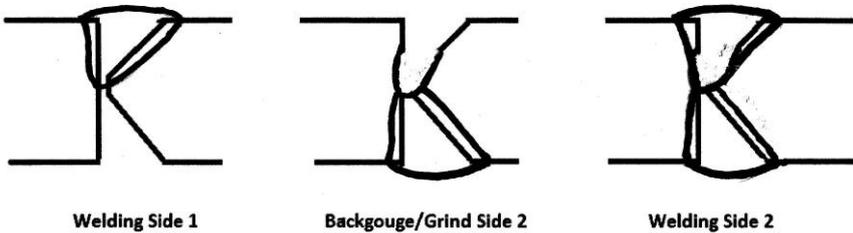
Welding Side 1 / Backgouge and Grind Side 2 / Welding Side 2
